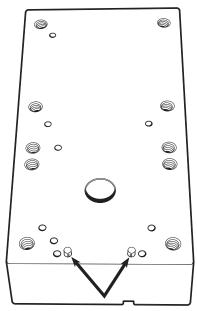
Short, bottom locating-pins (P/N 89553).
